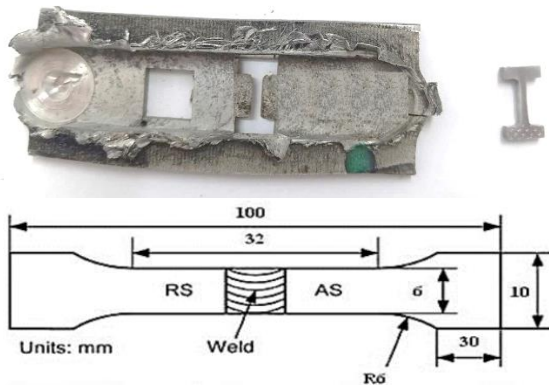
Welded sample and wirecut tensile sample from the welding site.
